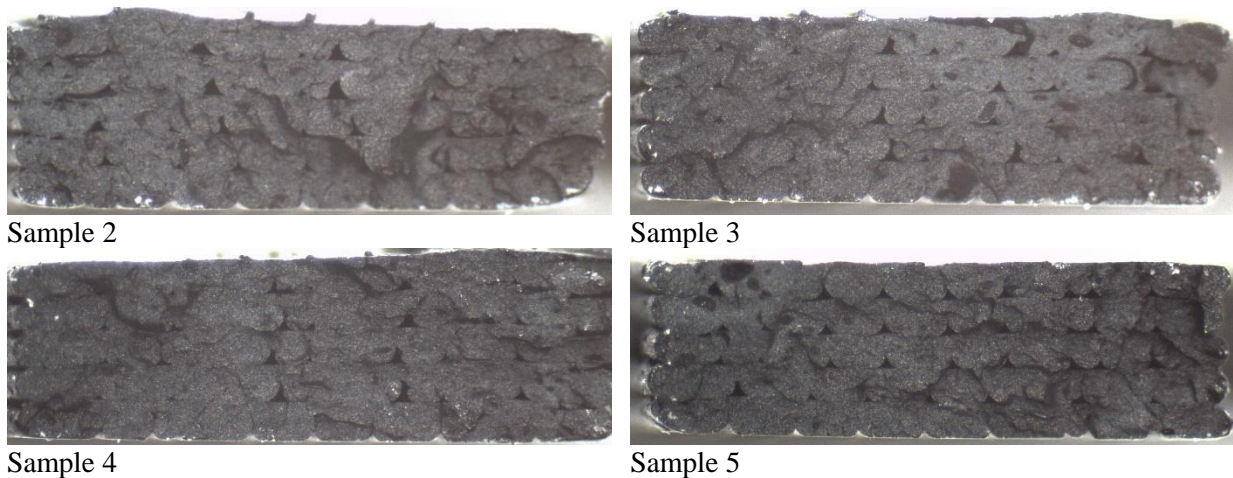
Fracture surface of printed tensile test samples, ABS/5 wt% CNT
